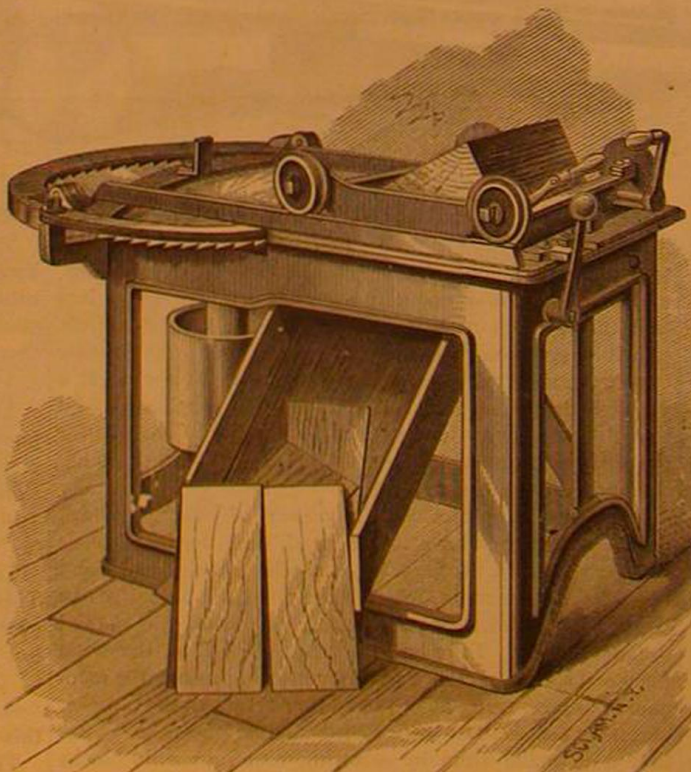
THE VICTOR SHINGLE-SAWING MACHINE.
